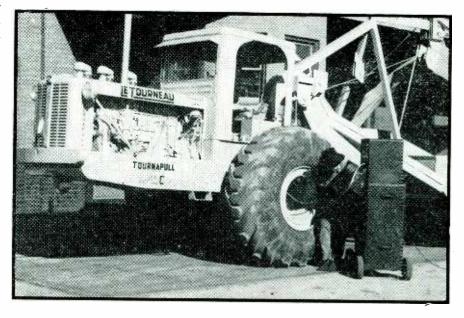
Checking axle of Tournapull Super Model C tractor with Supersonic Reflecto-
